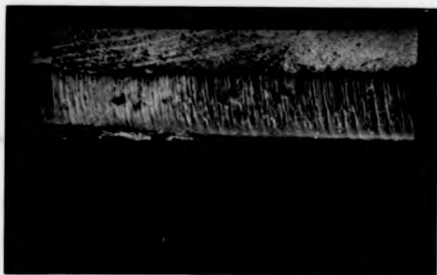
Showing pure oxide ceramic tool (ko60) when machining EN8 steel at speed of 400 m/min
